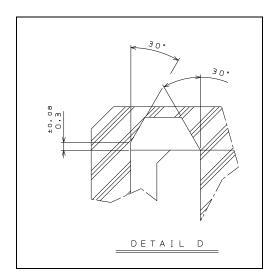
7.0 mm Slimline device plug connector interface dimensions section A-A
